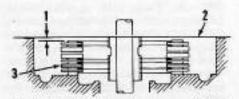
Sectional view showing space (1) to be measured under straightedge (2). Place extra stationary plate at location (3) only if necessary to bring disc height within specifications.
